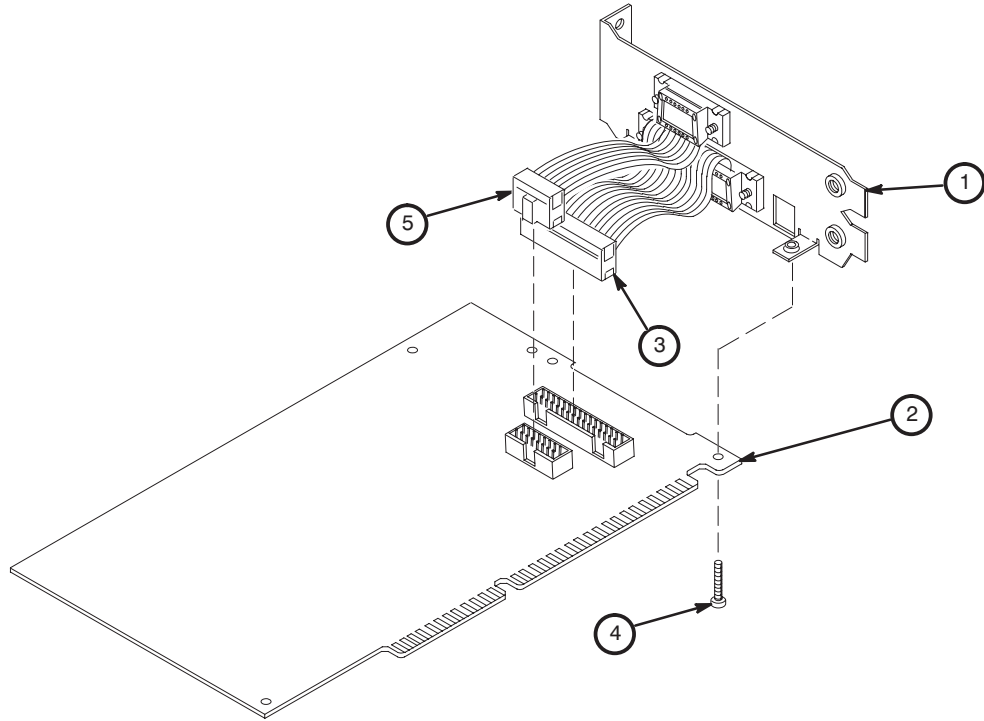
Removing Circuit Board From Assembly (TDS 400)
